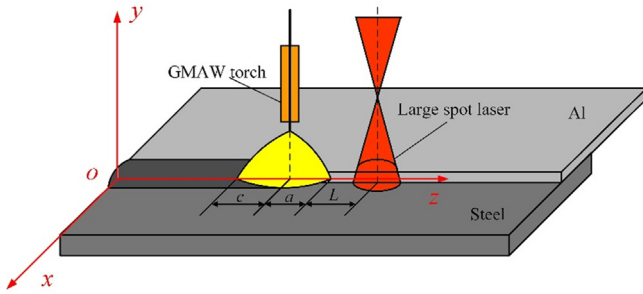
Schematic of laser + MIG arc welding experimental system.
